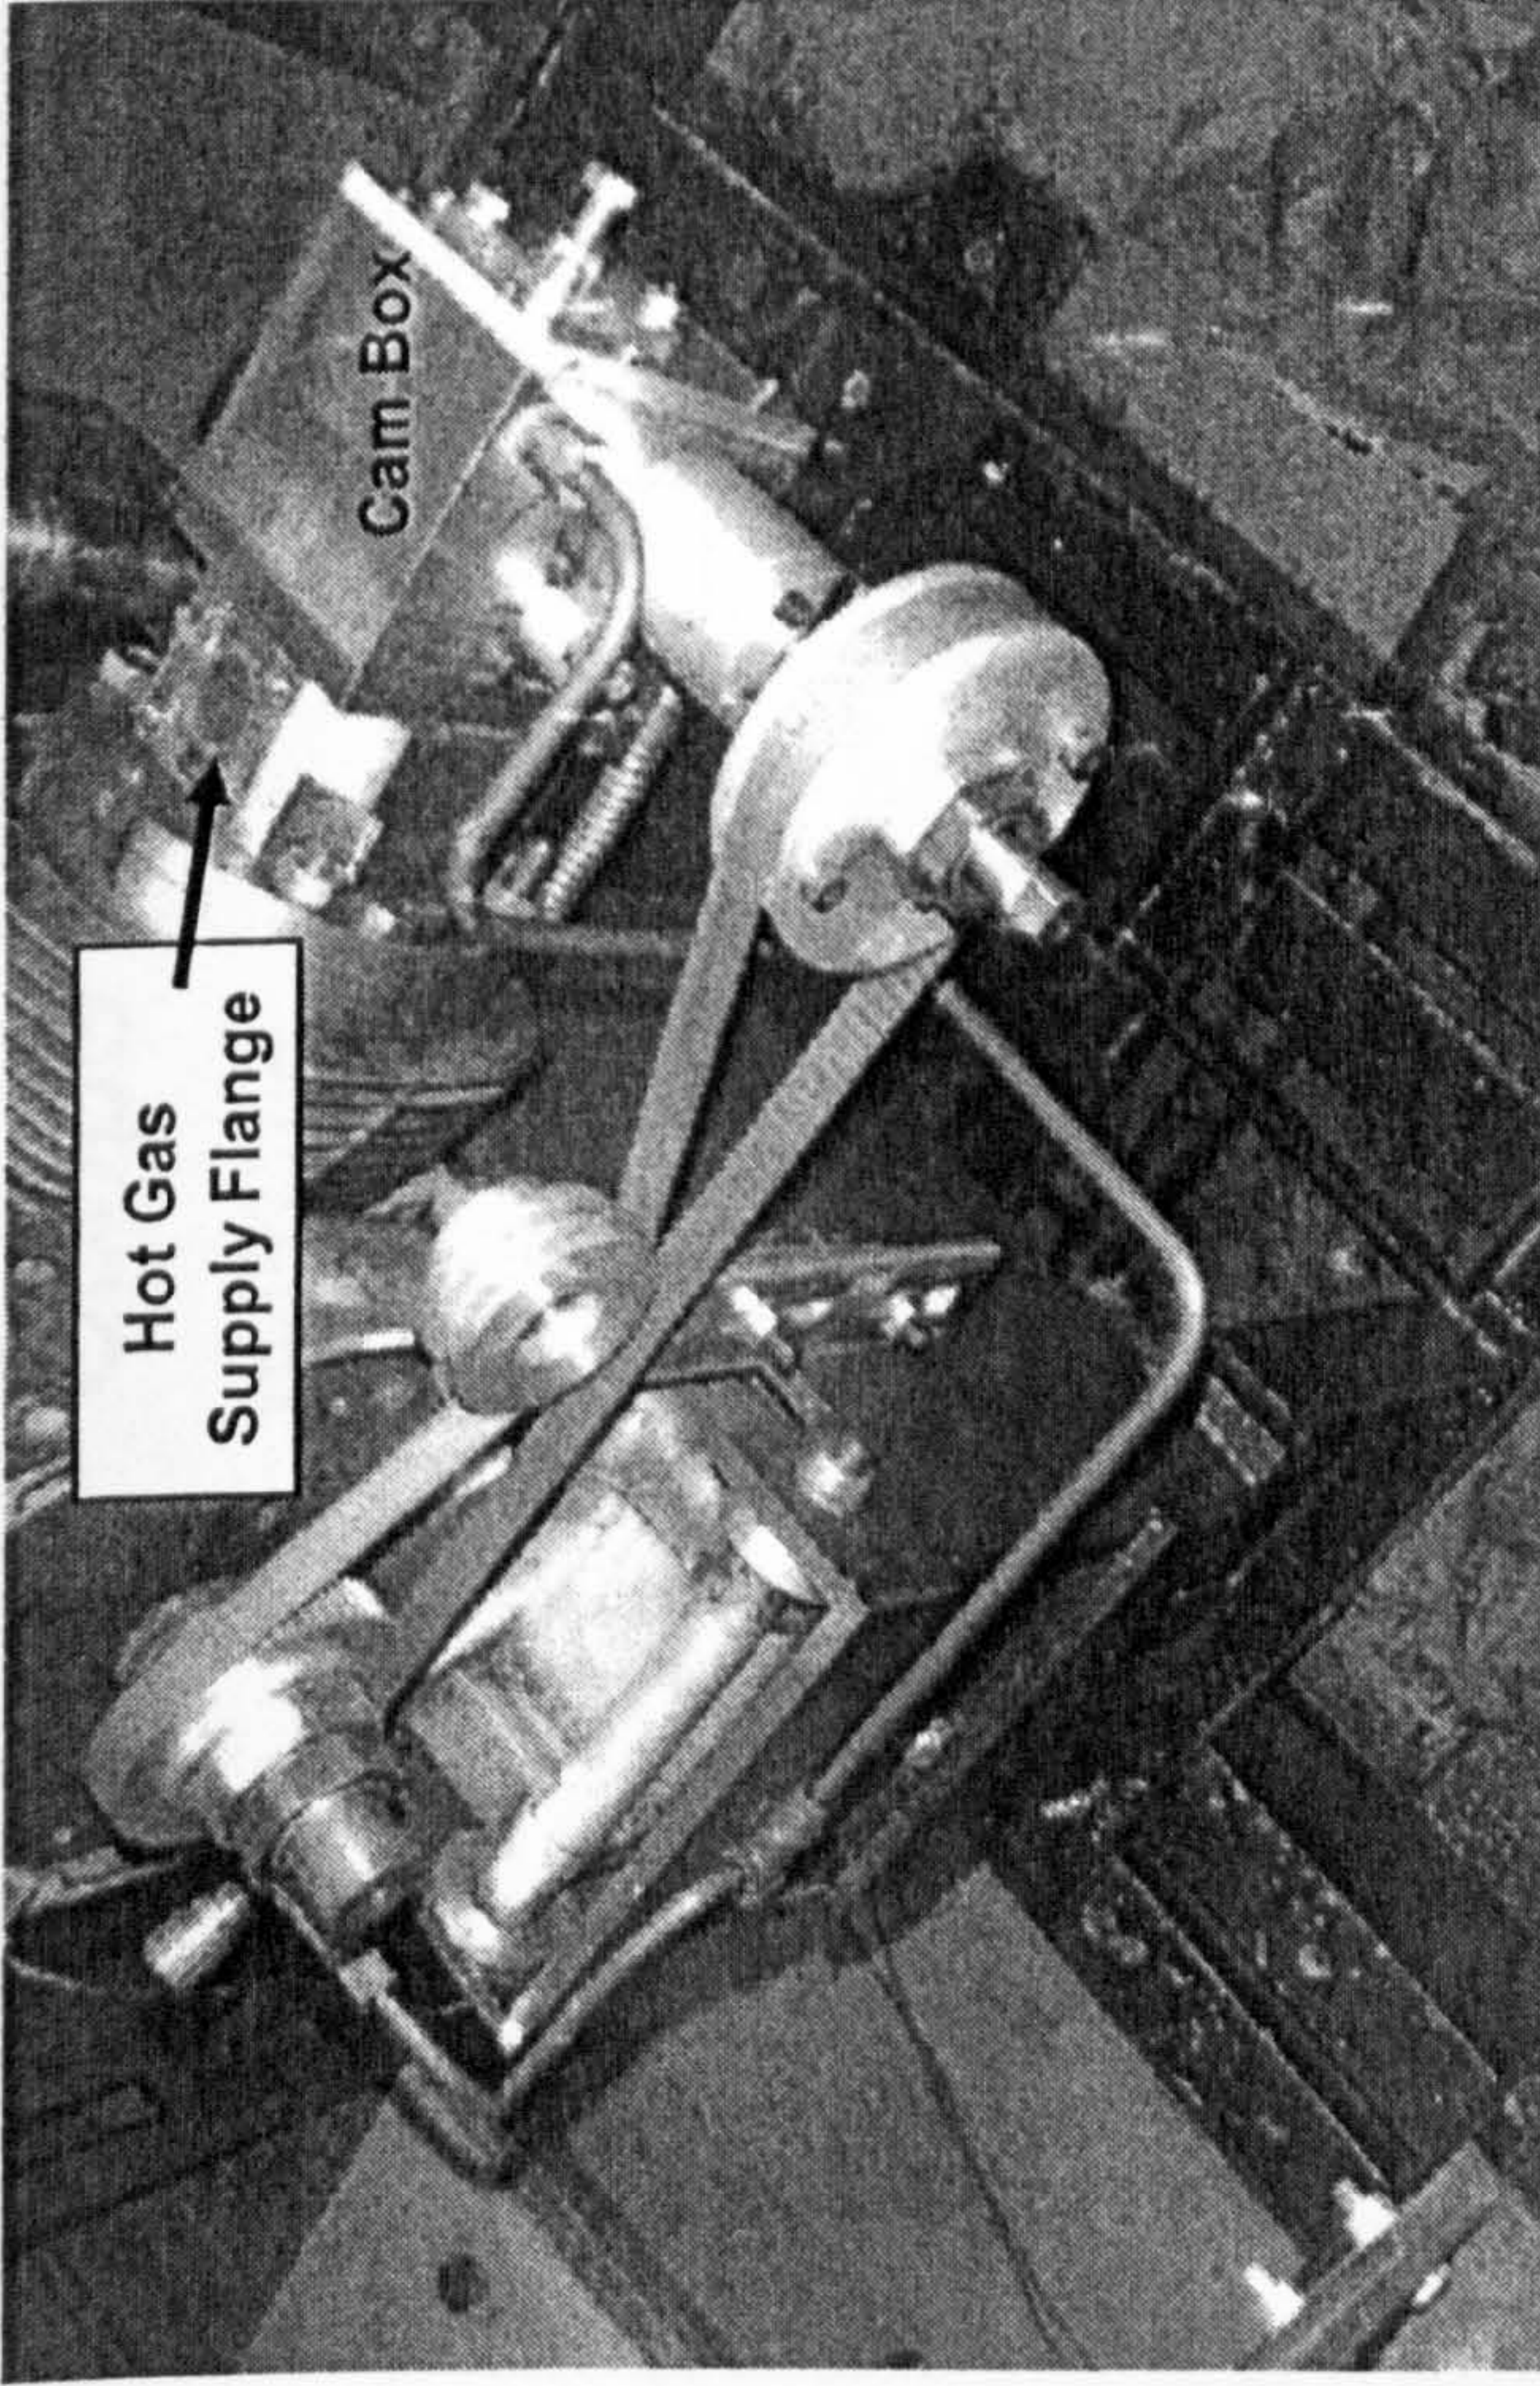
Cylinder Head and Cam Box Mounted on Engine
